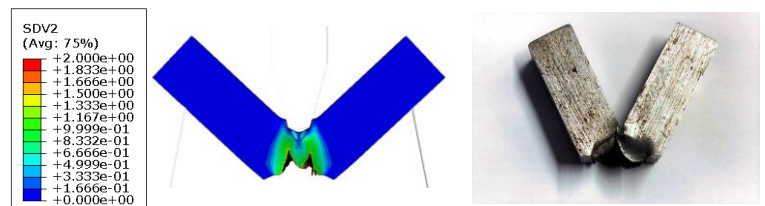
Ductile fracture mechanism with shear lips in Charpy testing.
